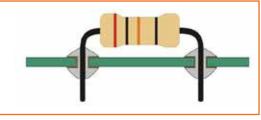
Thru-Hole Technology (THT) Assembly Process
